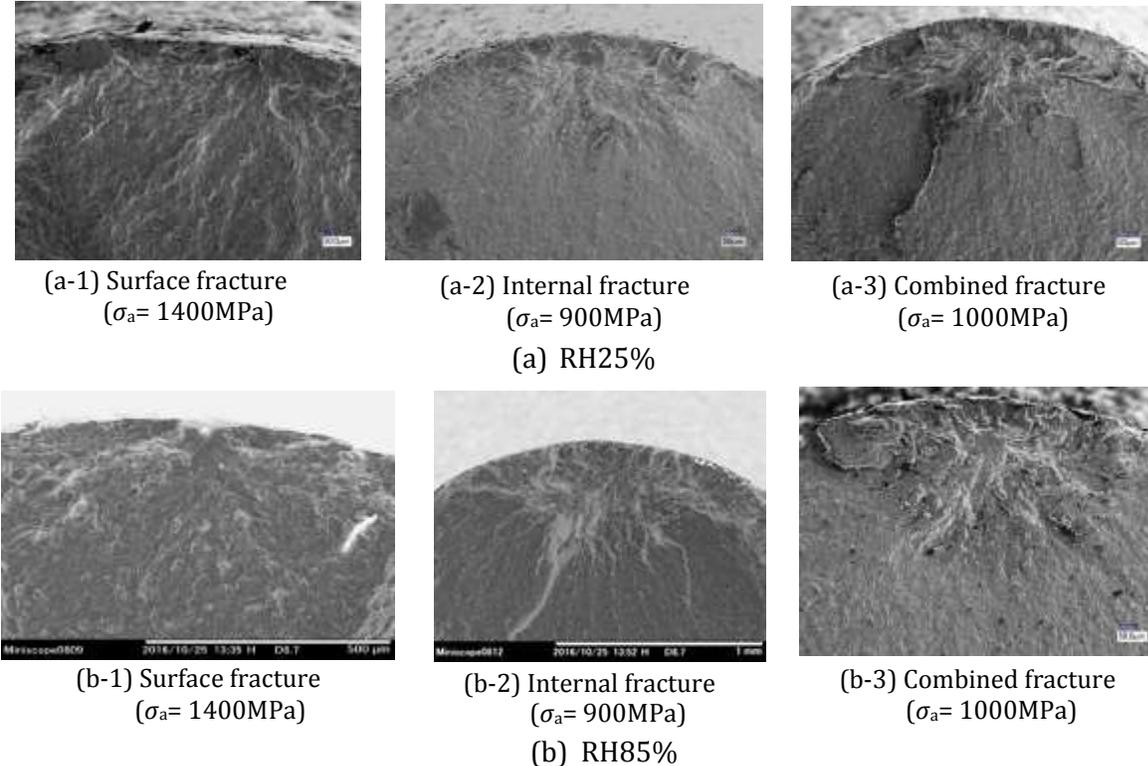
Fracture surfaces of shot-peened specimens
